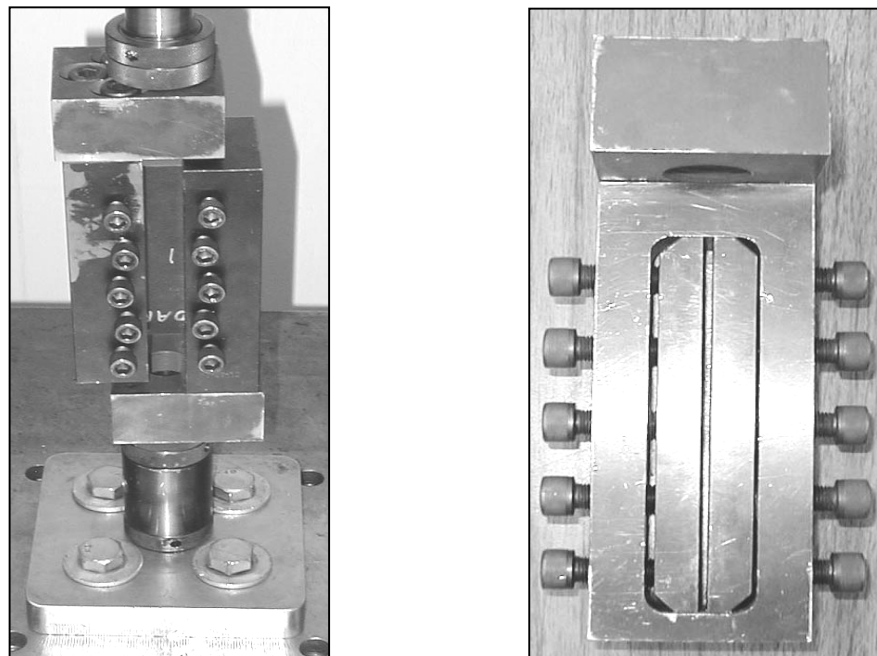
MODIFIED TWO-RAIL SHEAR TEST FIXTURE
